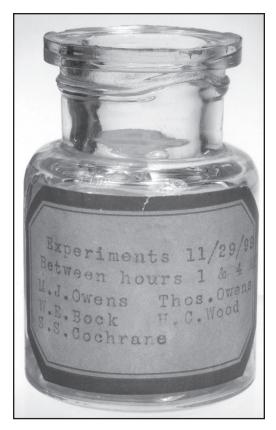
Photo of a bottle blown on the handheld pump machine. The paper label is dated "11/29/1899" (Floyd, Bowers, and Brownlee 2006). (Photo courtesy of the Owens-Illinois, Inc. Archives, MSS-200, Ward M. Canaday Center for Special Collections, University of Toledo.)
